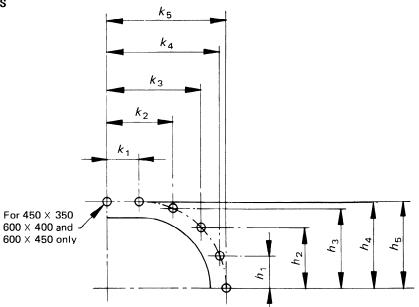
Manholes, types C and D - Dimensions and layout of fasteners
